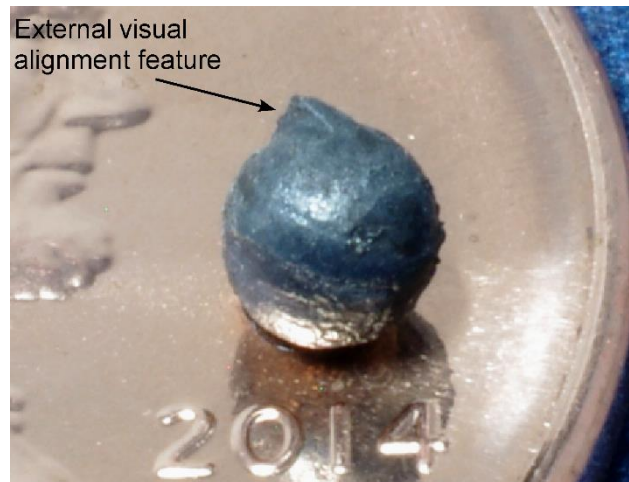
Final package after bonding and flash removal process. The outer diameter of the package is 2.45 mm.
